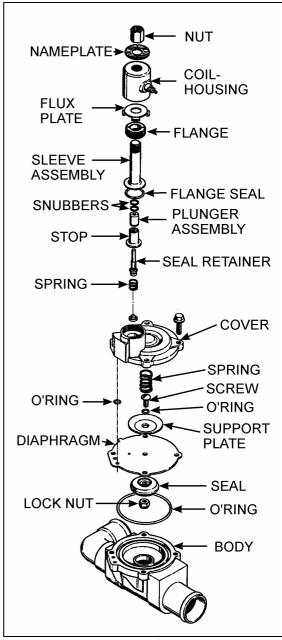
CENTRAL WATER SOLENOID VALVE 22183
